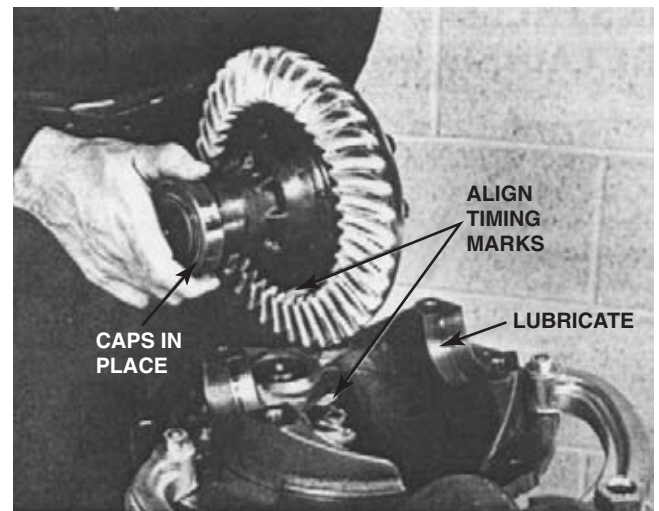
With threaded adjusters, the differential with bearing cups in place is set into the case. Make sure to align the timing marks on non-hunting gear sets. (Courtesy of Ford Motor Company)
